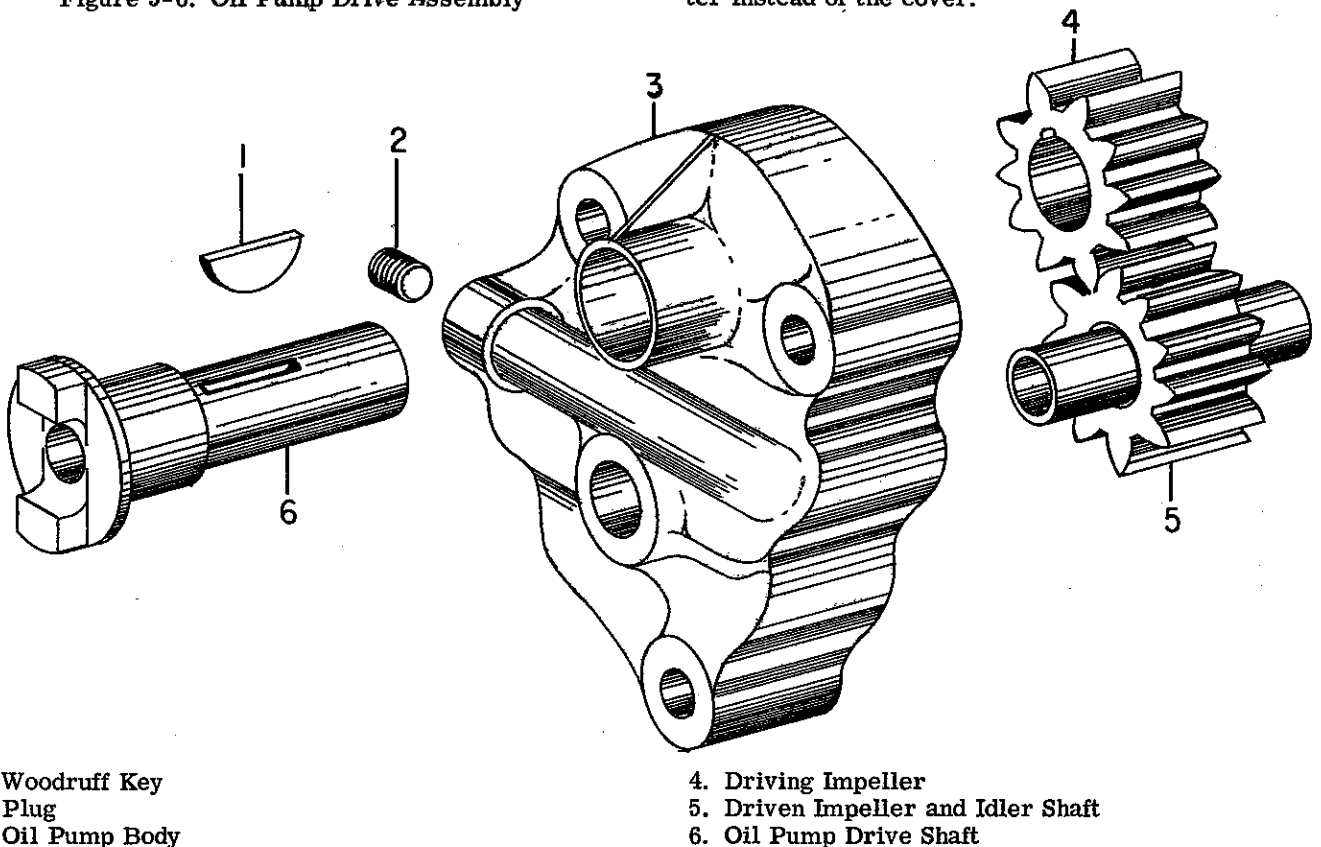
Oil Pump Drive Assembly (Sintered Iron Impellers)
